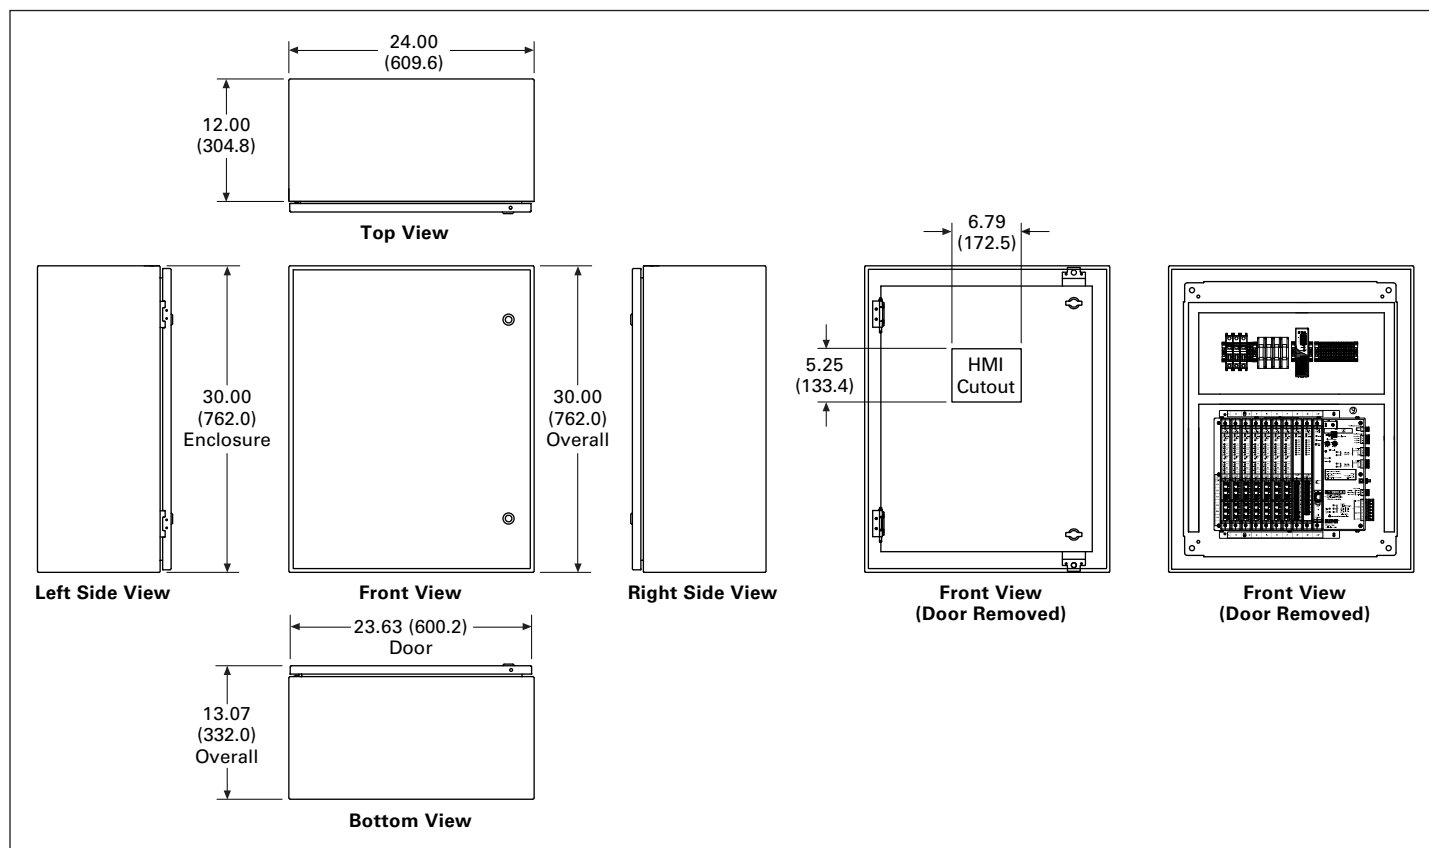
Dimensions of Enclosed PXMP—NEMA 4X
